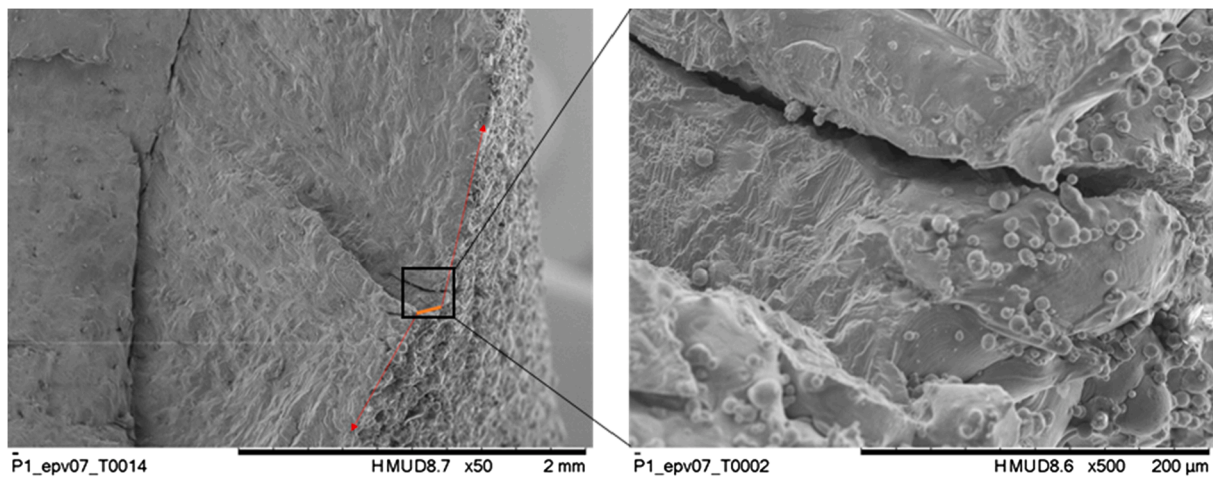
Crack path and defects at the origin of failure in an as-built LPBF 316L torsion specimen.
